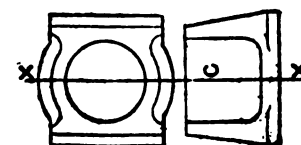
Fixture for Splitting Ten Pieces at a Time
